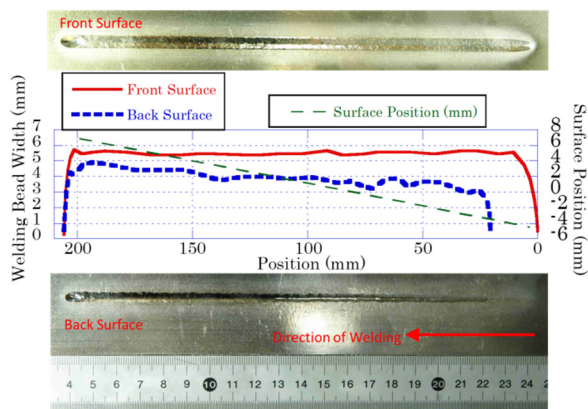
Welding bead width when the focus position from the surface changed.
